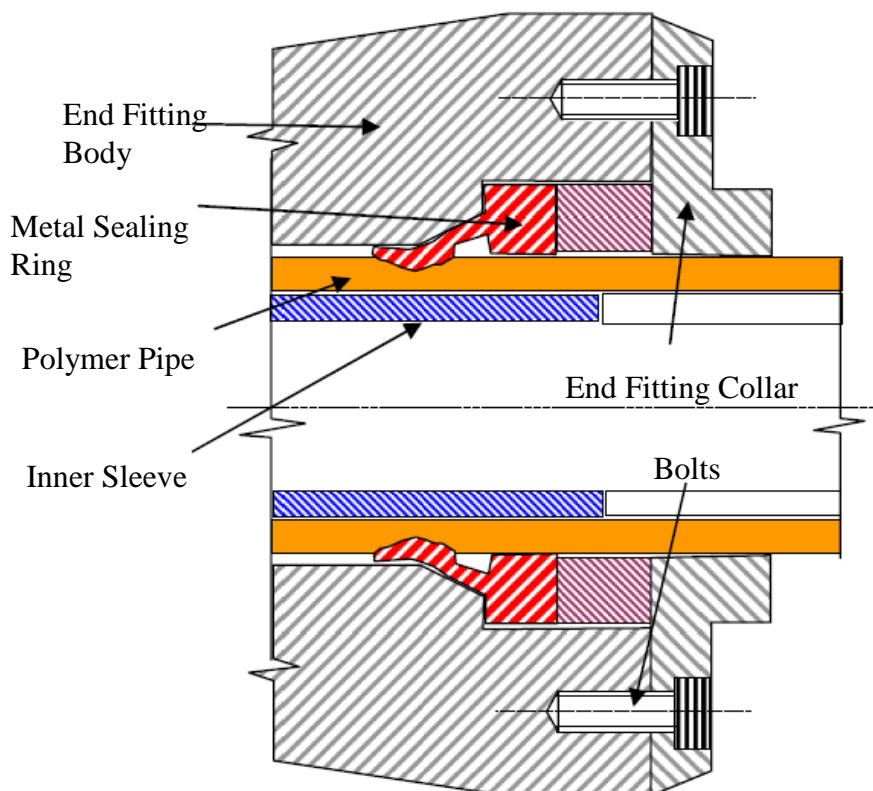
The end fitting seal assembly, from Fernando *et al.* [2012].
